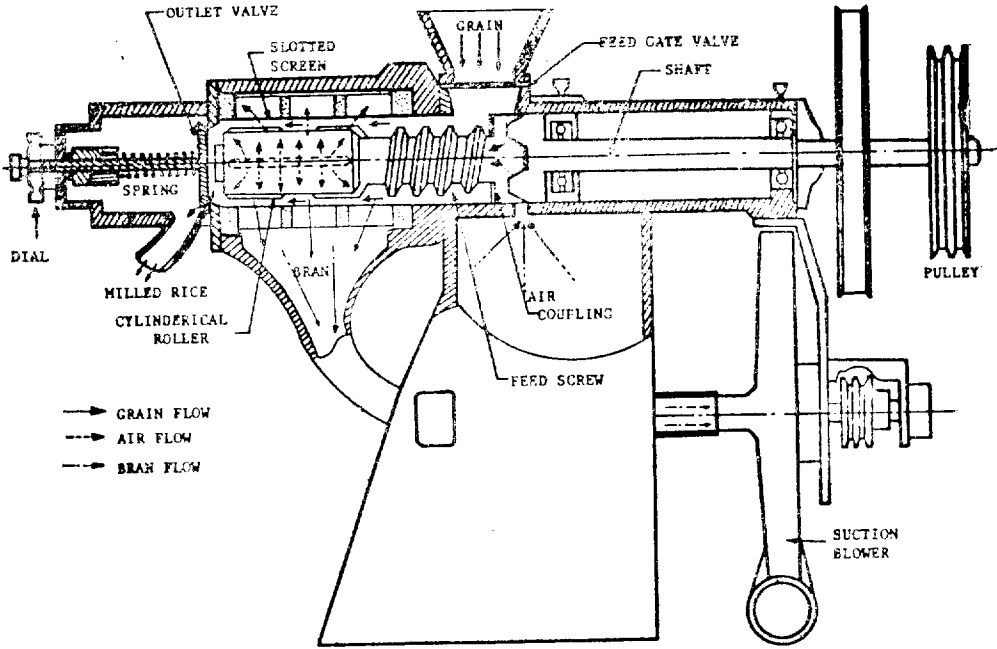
Schematic drawing of friction type whitening machine used for experiment.
